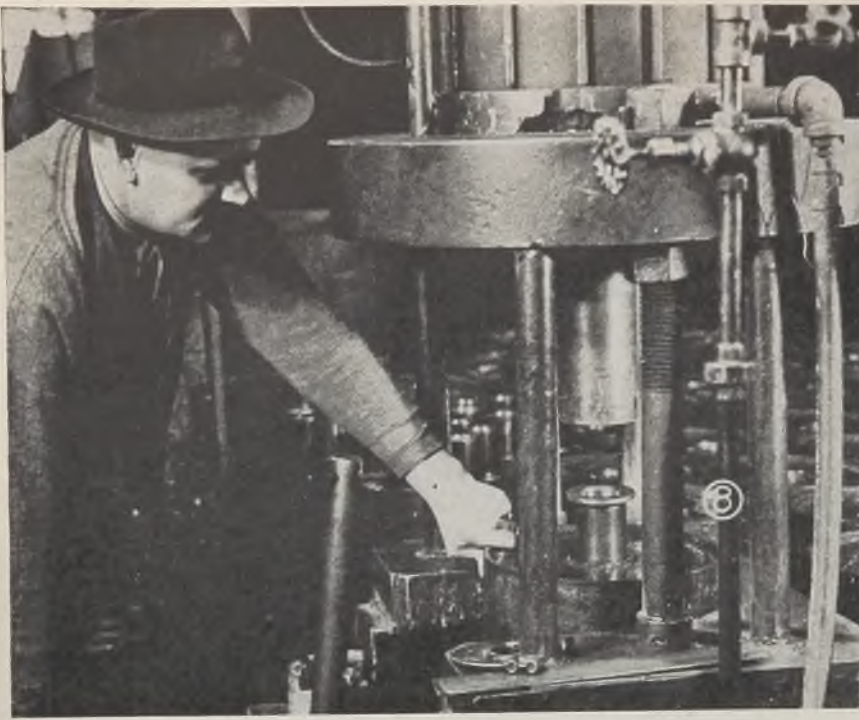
Roller is completed by pressing bearing housing in hub using pneumatic press as shown
